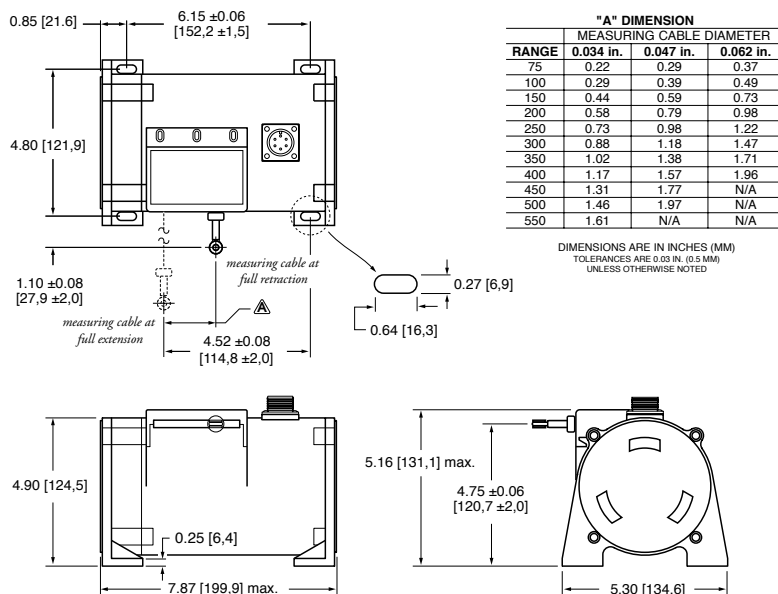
Outline Drawing (26 oz. cable tension only)
